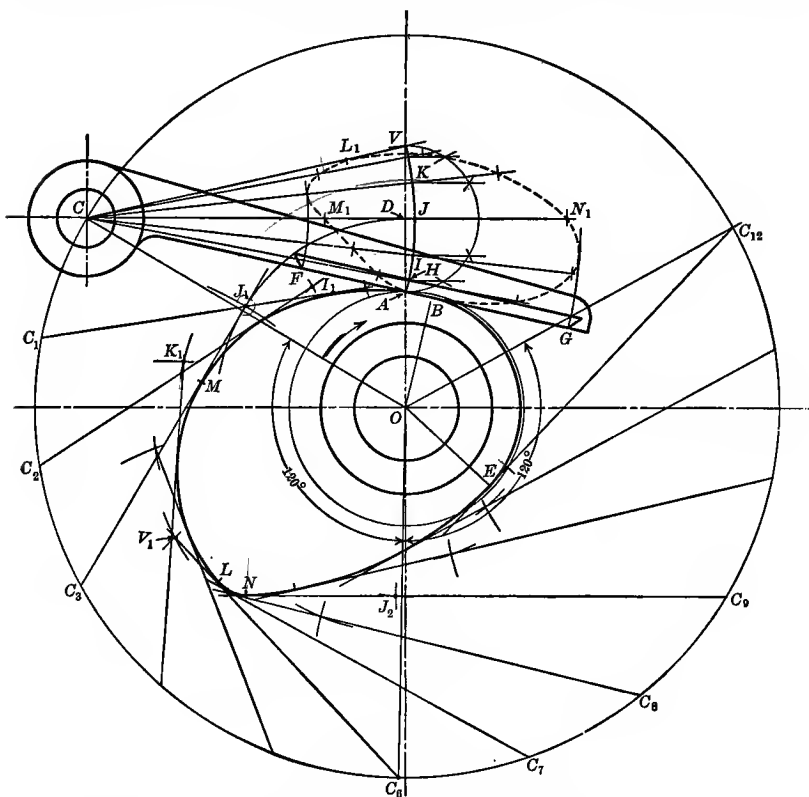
PROBLEM 11. CAM WITH SWINGING FOLLOWER ARM, SLIDING CONTACT
